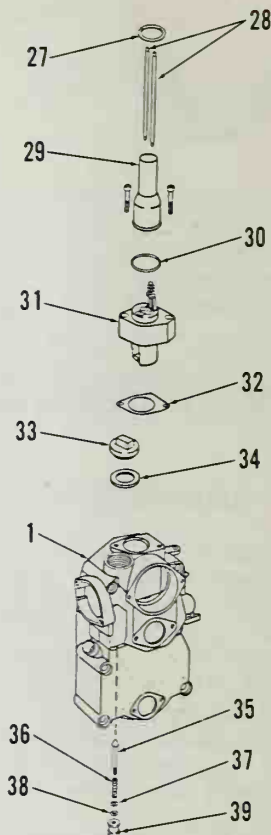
Exploded view of push rod tube and excess fuel assemblies. Excess fuel components (35 through 39) are not used on Model 15A430.
